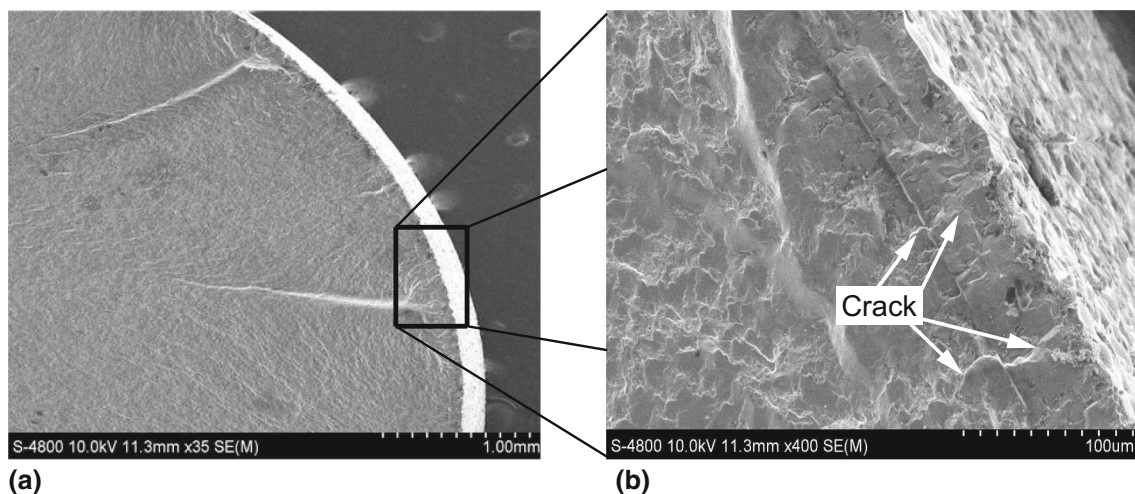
Micrograph of the fractured surface of a failed HVOF-coated specimen (a), and a close-up view near the fatigue crack (b)
